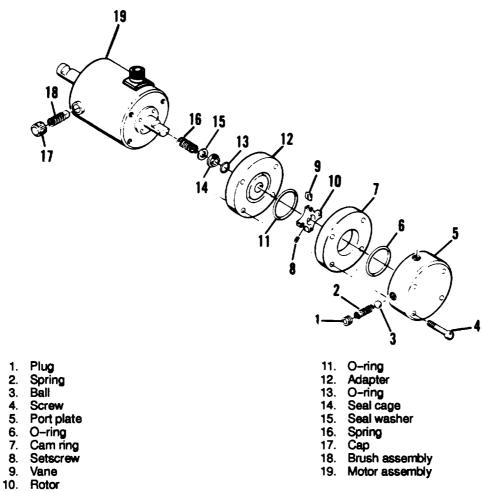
Coolant Pump and Motor Assembly, Exploded View
